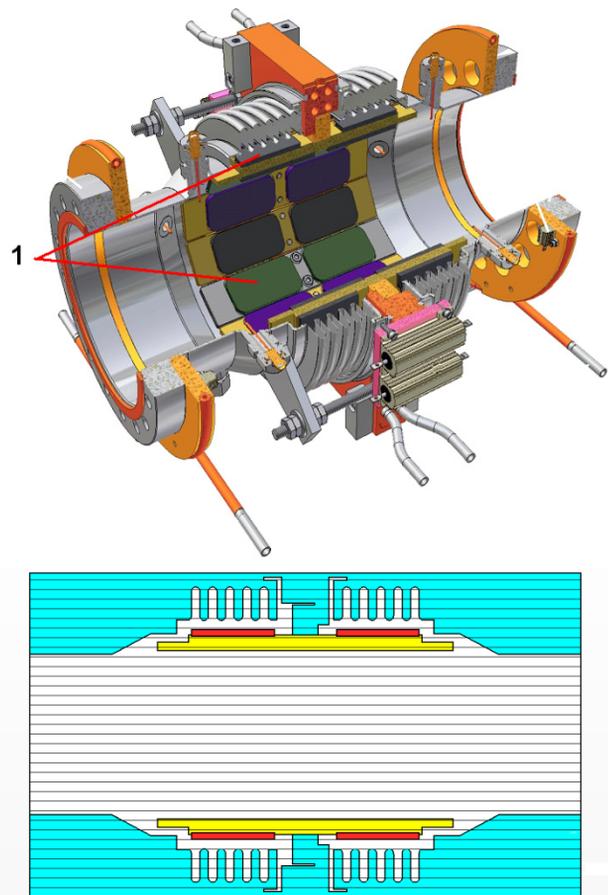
HOM load. Top: 1 – absorbing tiles on both sides of plate. Bottom: MWS model of the load without inner tiles.
